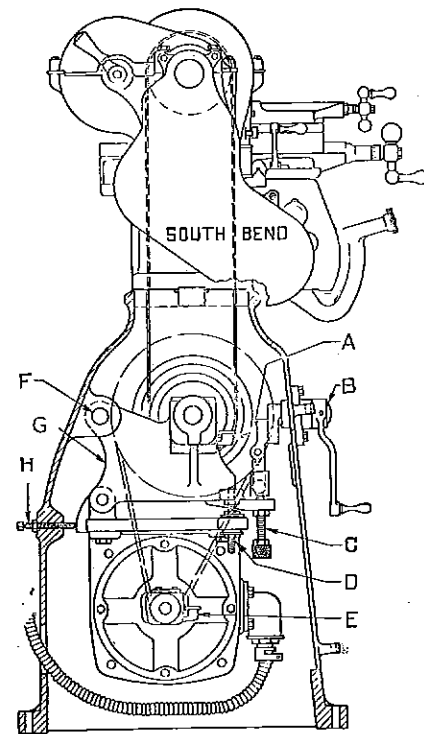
Cross Section End View of Underneath Belt Motor Driven Lathe.
